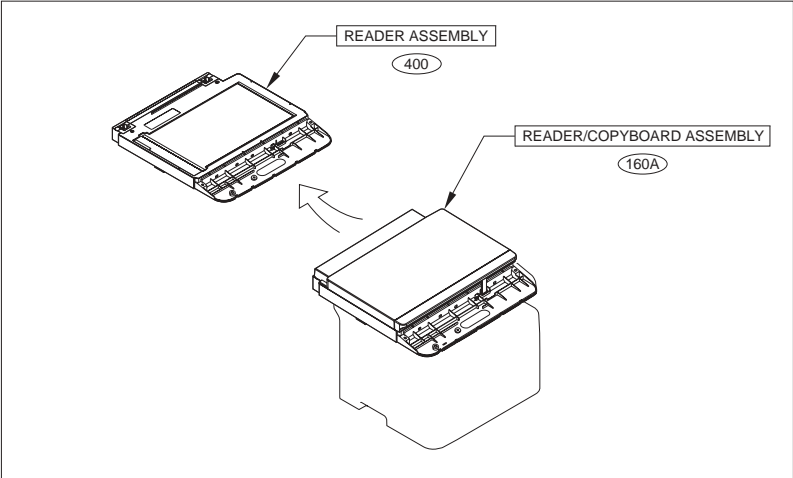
ASSEMBLY LOCATION DIAGRAM
